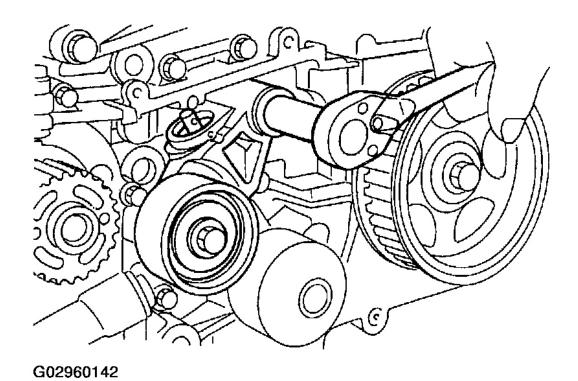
Removing Automatic Belt Tension Adjuster Assembly Courtesy of SUBARU OF AMERICA, INC.
